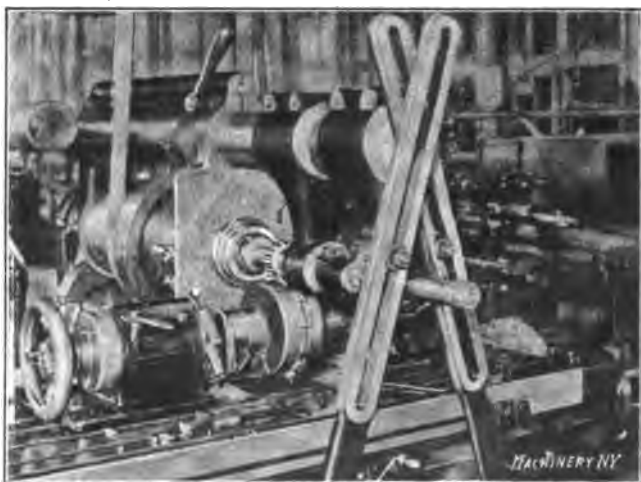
Milling the Driving Slots in a Pair of Gear Case Covers
